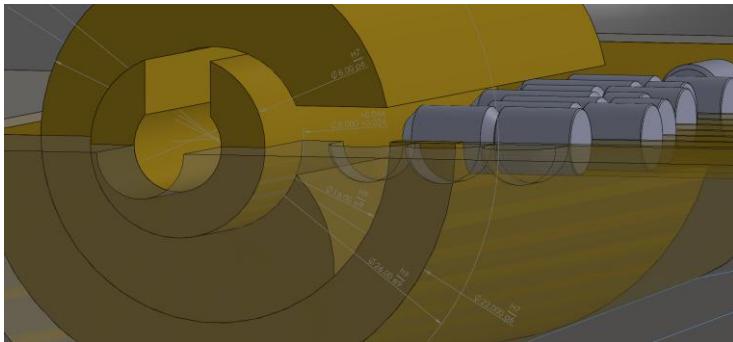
Suggested Tolerances for Locking Mechanism
